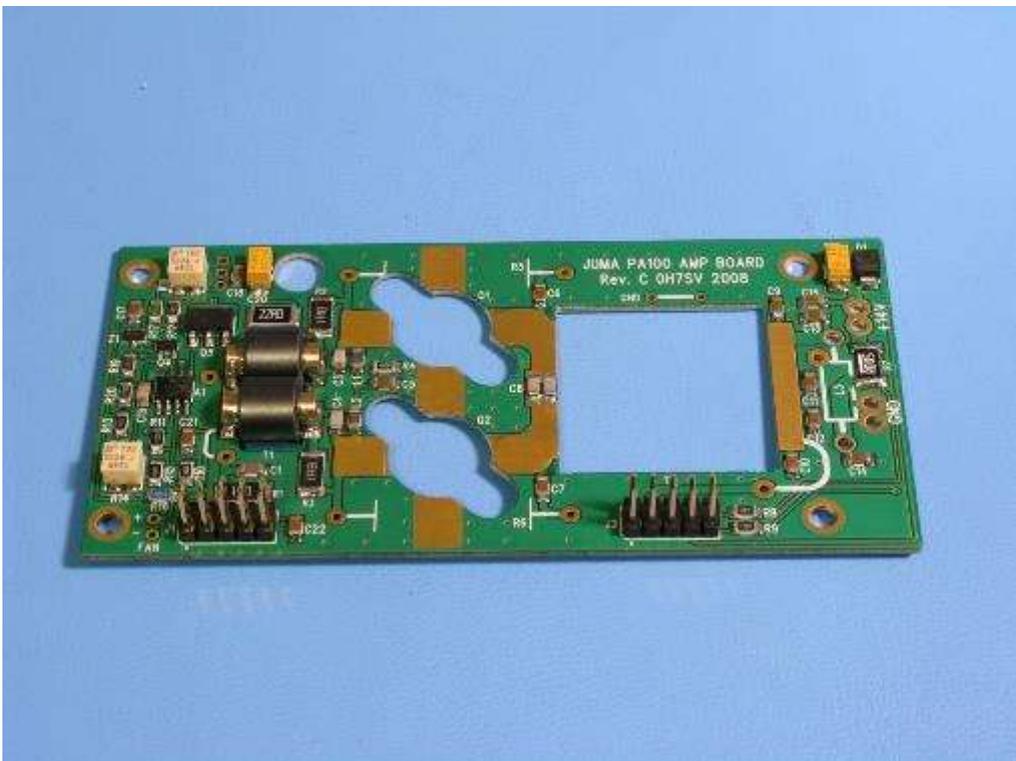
Solder T1 tubes with the ferrite beads. Solder the pin header connectors
